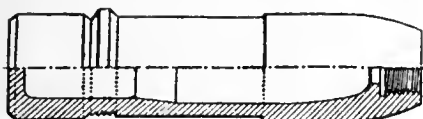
FRENCH 75 MM. HIGH-EXPLOSIVE SHELL.
